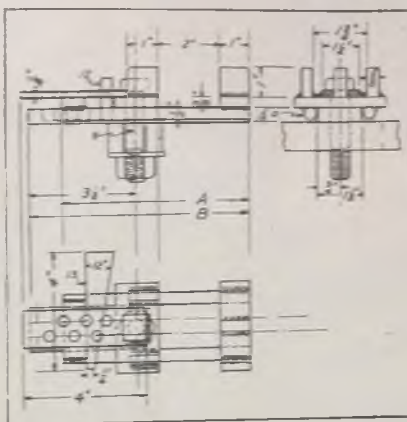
Details of the special universal jig clamp described here for use with the universal jig shown in other illustrations
